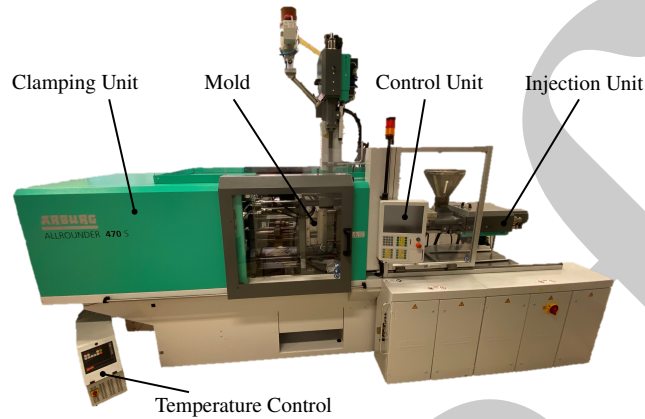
Injection molding machine ALLROUNDER 470S
